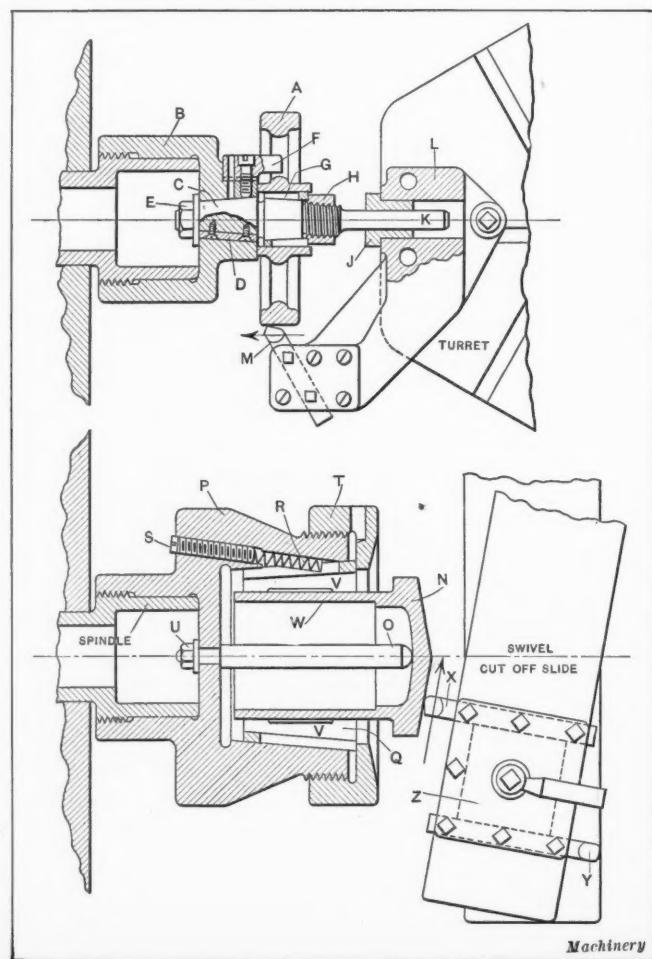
Spoke Gear Blank held on an Expanding Bushing, and Pot Casting held in a Collet Chuck
